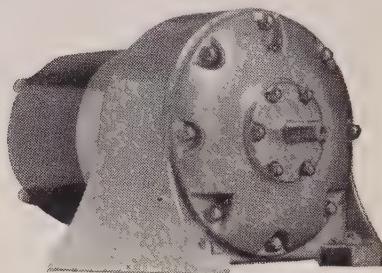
Original Construction of gear motor housing. Required 90% more machining. Weighed 175% more than welded steel.
